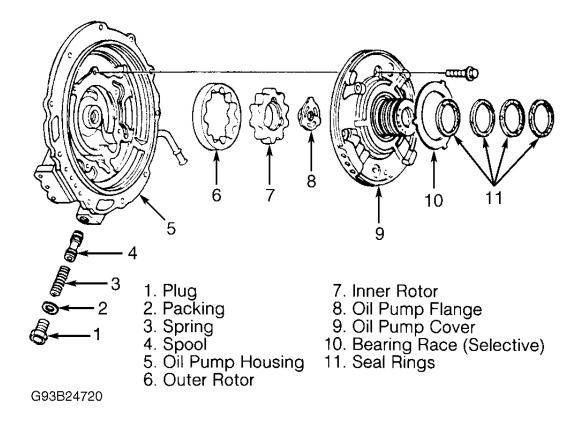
Exploded View Of FA4A-EL Oil Pump (GF4A-EL Is Similar) Courtesy of MAZDA MOTORS CORP.
